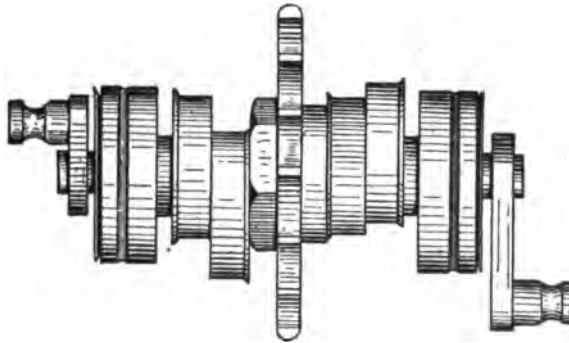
Crank Shaft of the "Locomobile" Steam Carriage, showing the cranks at both ends, the ball bearings and eccentrics, and the sprocket at the centre. Most steam carriage engines have similarly arranged crank shafts, although with several makes the entire mechanism is turned from one solid casting.
